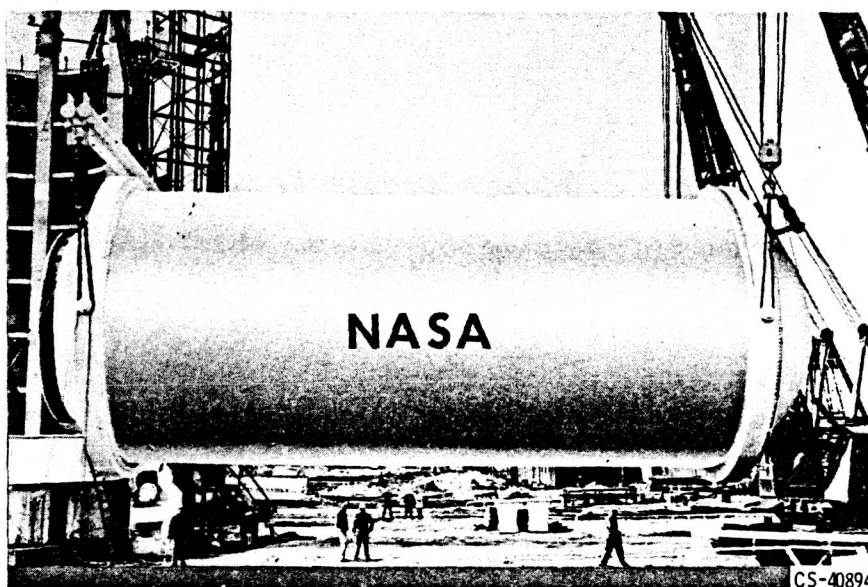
260-Inch-diameter casing manufactured with the use of multiple-pass tungsten-inert gas welding technique.
